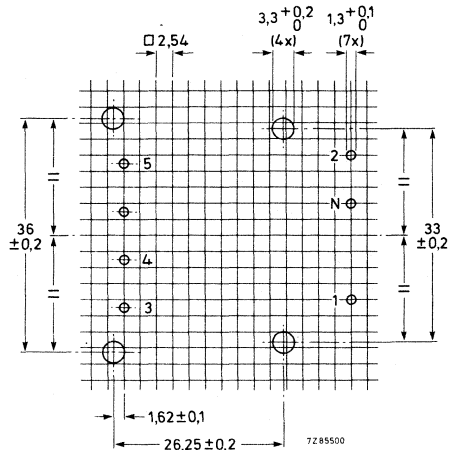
Hole pattern for mounting on a printed-wiring board, viewed from solder side.
